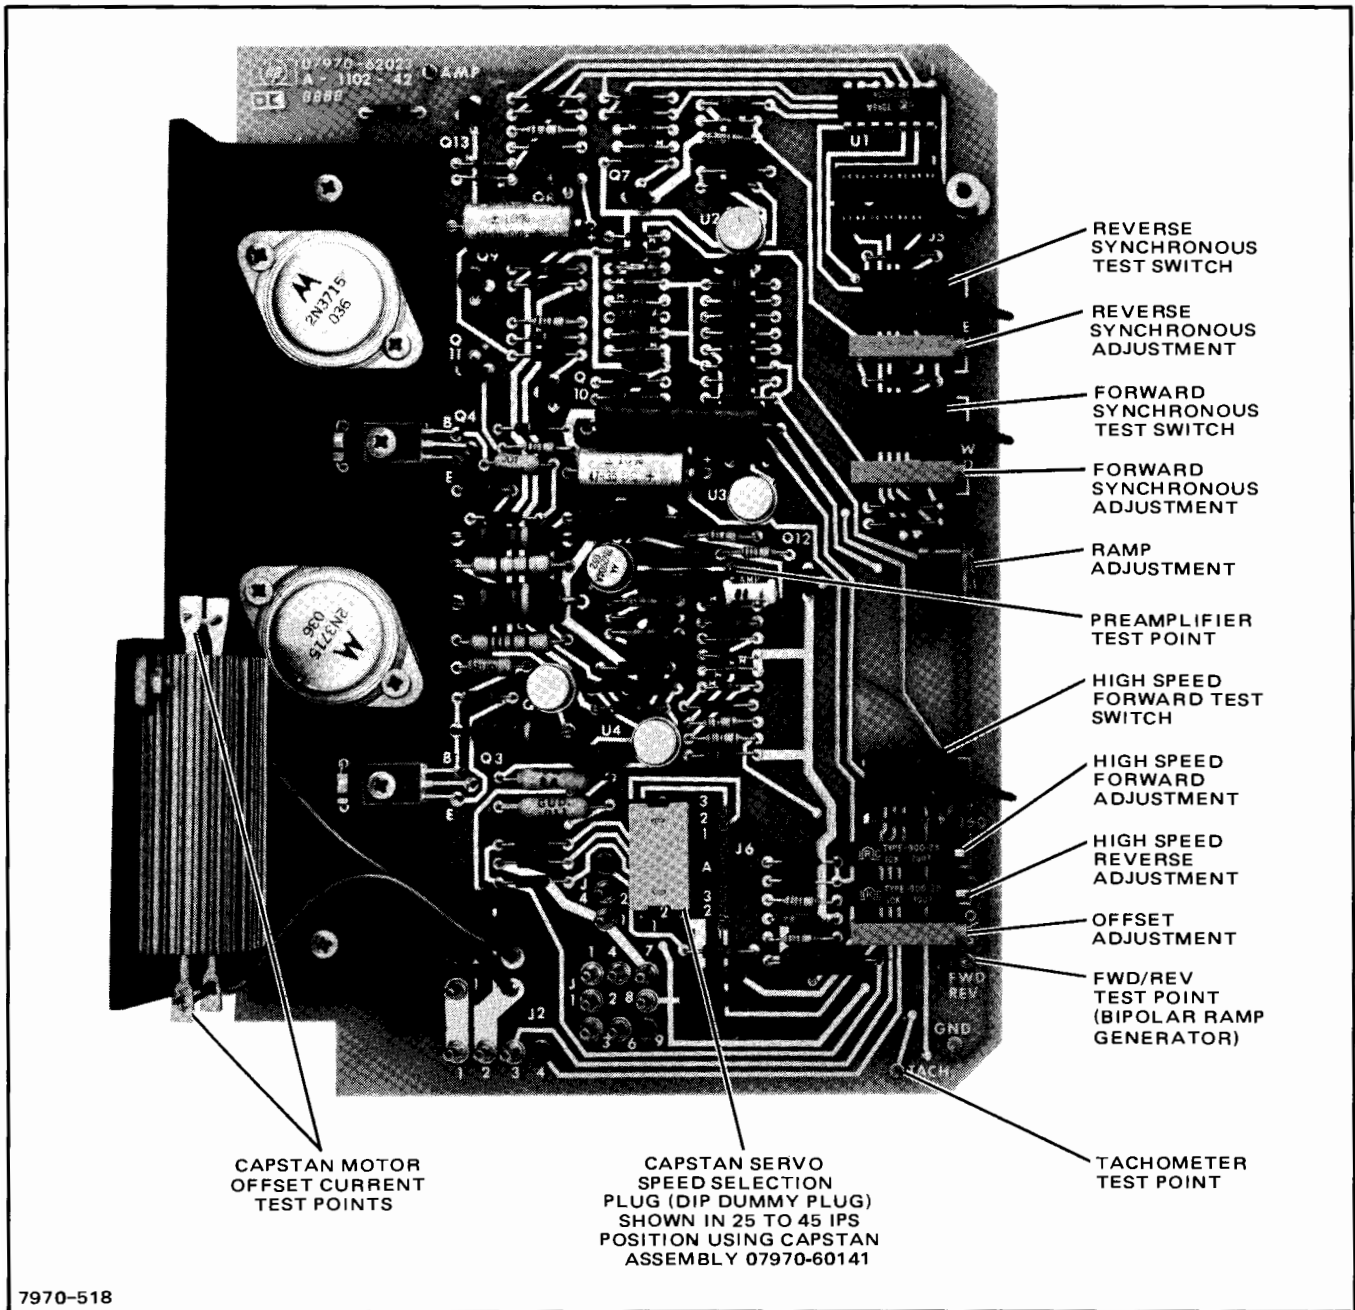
Capstan Servo PC Assembly, Test Points and Adjustments
